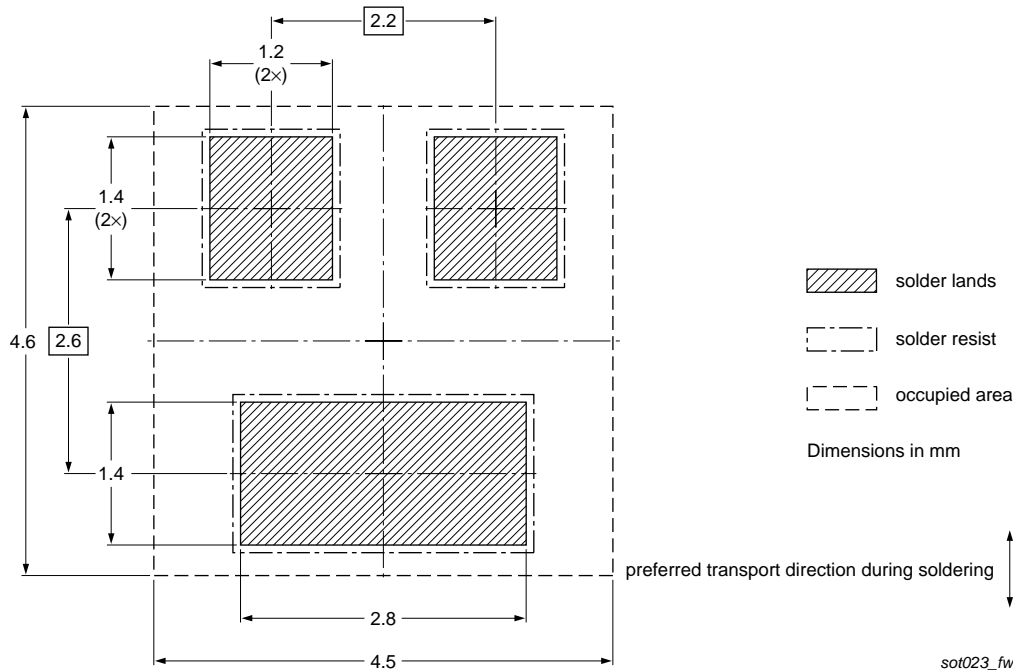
Wave soldering footprint for SOT23 (TO-236AB)
